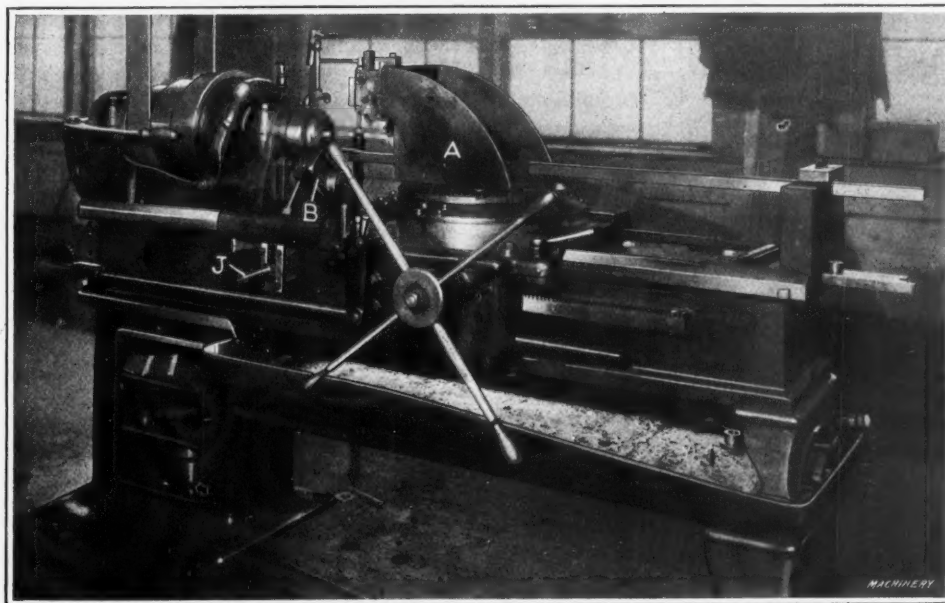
Old Type of Jones & Lamson Turret Lathe especially equipped for turning Cutter Blanks
